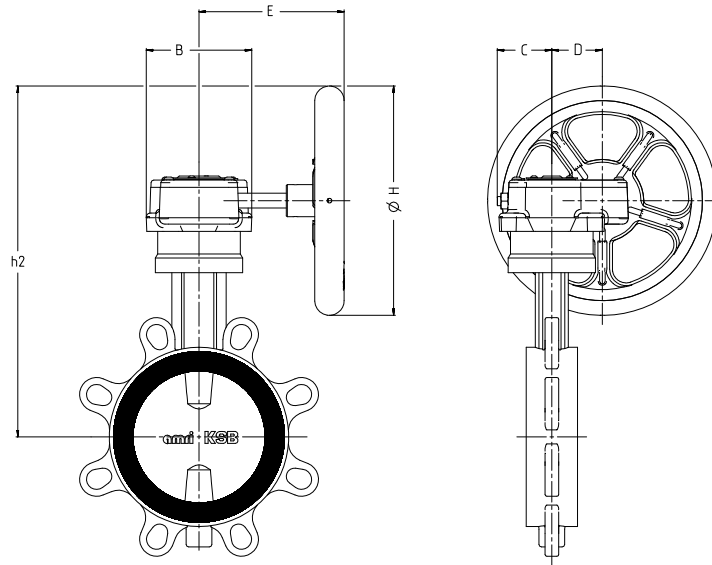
Unit comprising BOAX-S + MS manual gearbox
